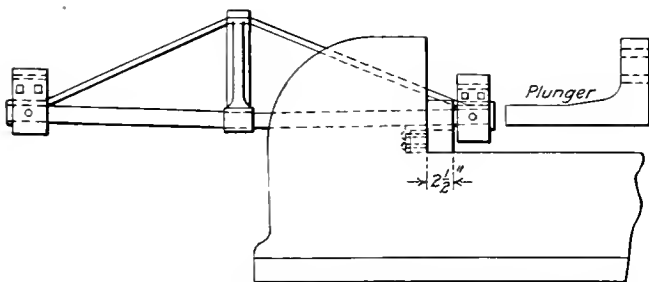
Effective Method of Removing Old Brake Shoe Heads from Brake Beams; Central of New Jersey.
